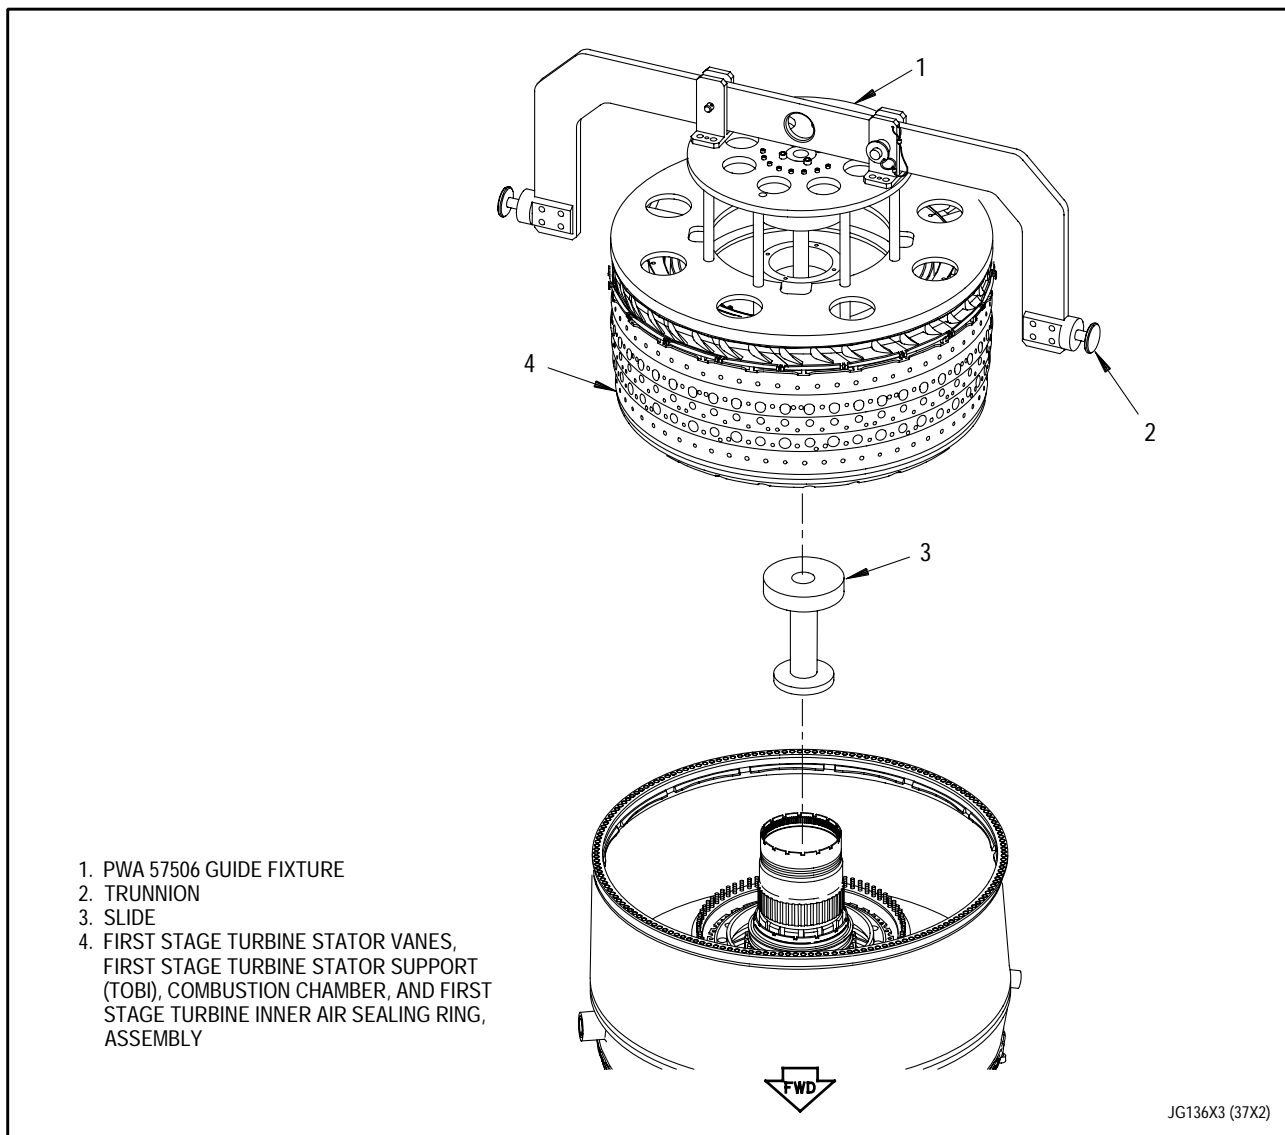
First Stage Turbine Stator Vanes, First Stage Turbine Stator Support (TOBI), Combustion Chamber, and First Stage Turbine Inner Air Sealing Ring - Installation Using PWA 57506 Guide Fixture
